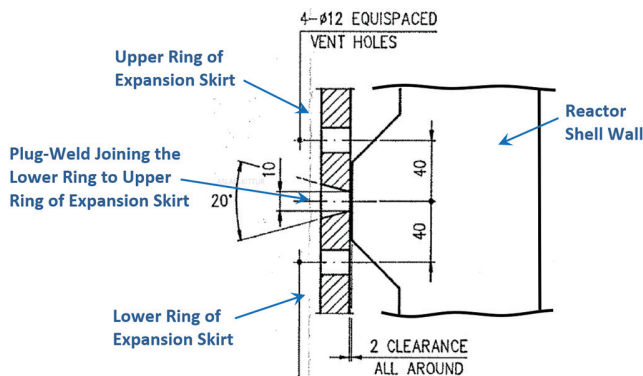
Plug weld: Expansion skirt assembly.
